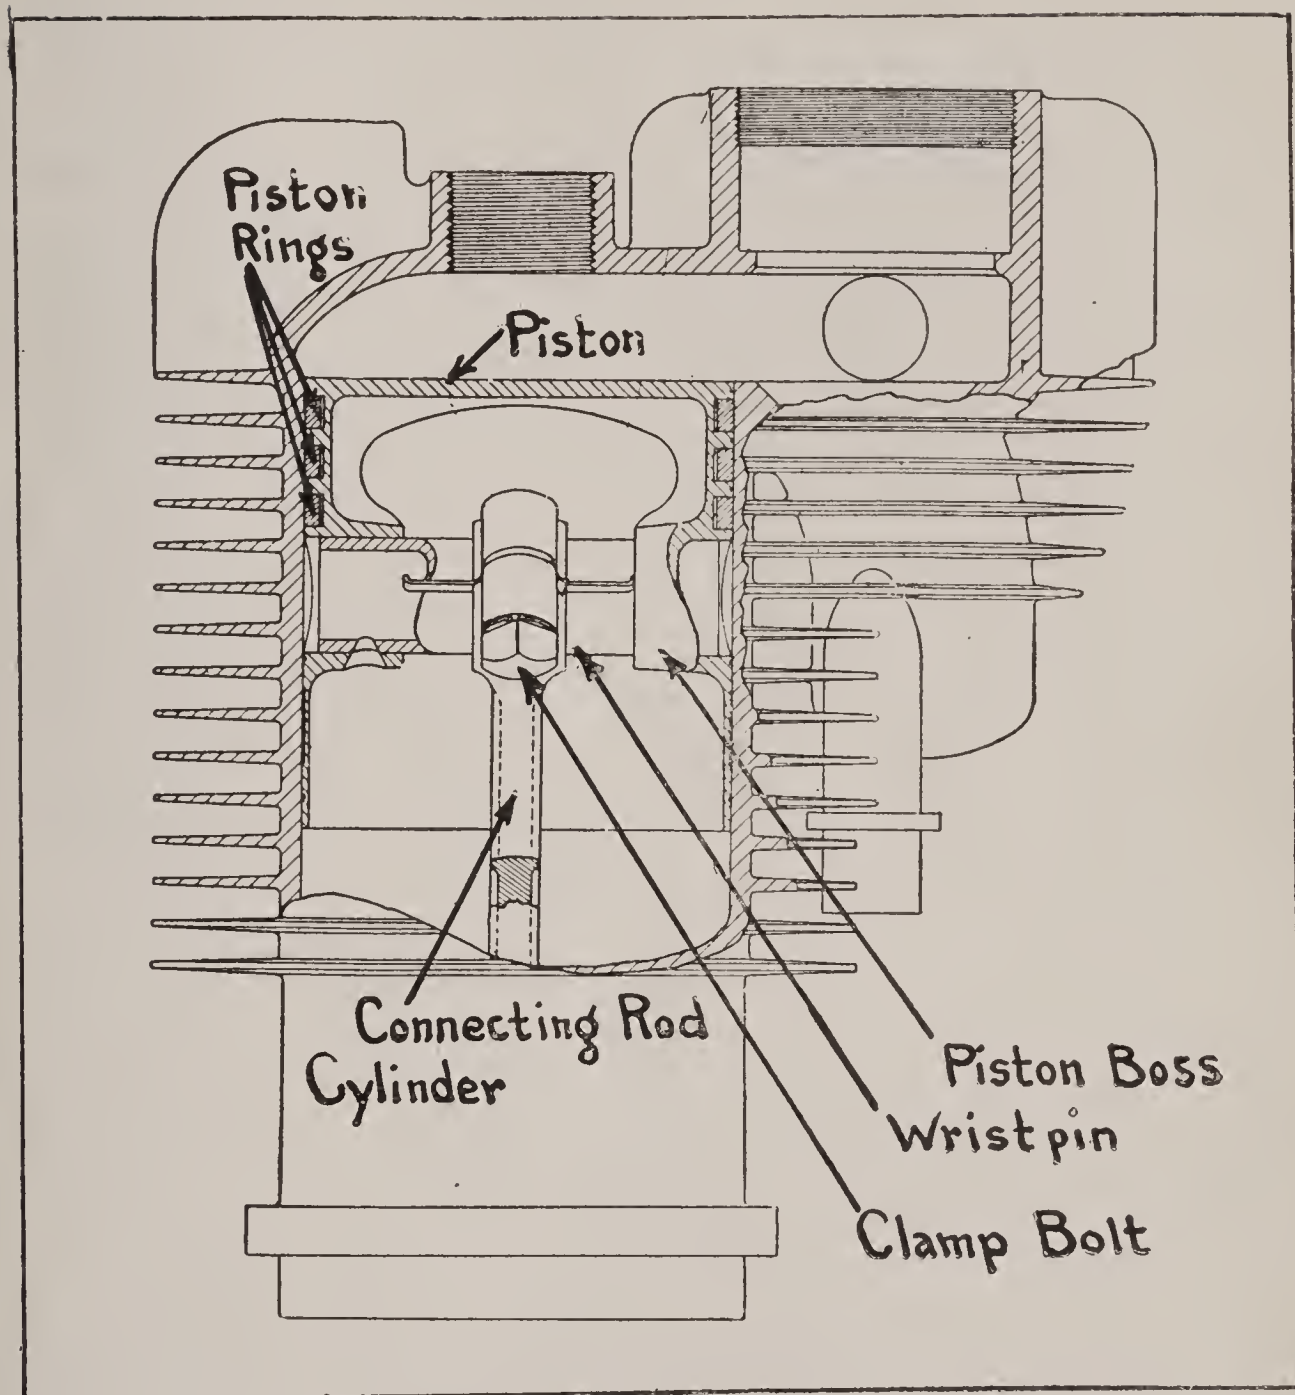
Part Sectional View of One-Piece Cylinder, Defining Construction of Piston, Wrist Pin, and Upper End of Connecting Rod.
